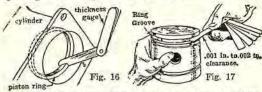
To measure ring-gap clearance, place the piston without rings into the cylinder. Then slip the ring into the cylinder be find the piston. It may be necessary to slightly file the edges of the ring to do this, as some rings are oversize when new. Pull the piston up against the ring in order to square the ring up in the cylinder. If the cylinder is worn, it is usually where the rings travel; therefore fit it to the smallest part. A thickness gauge is then applied, as shown.
